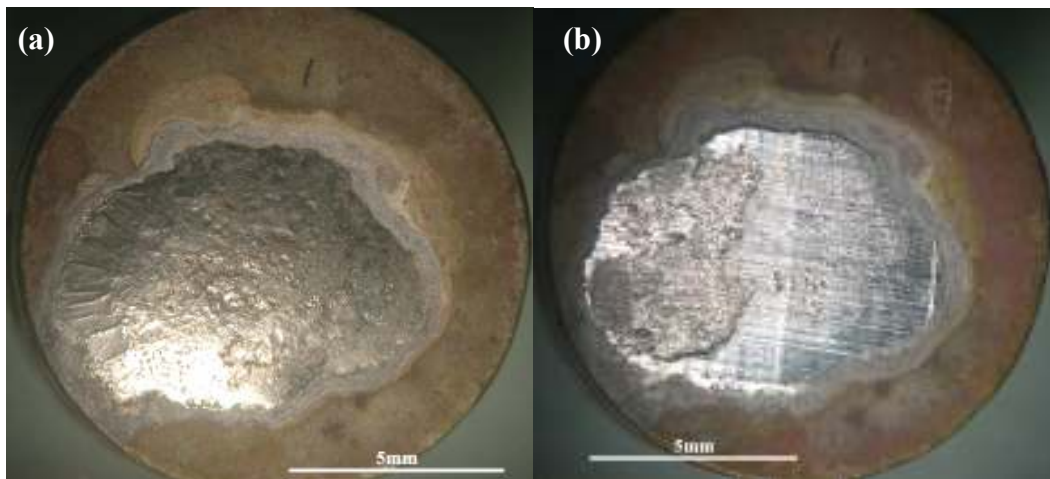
Macroscopic images (top view) of stabilized Sn-0.7Cu solder on Cu substrate with Ag finish (a) before shear (c) after shear
